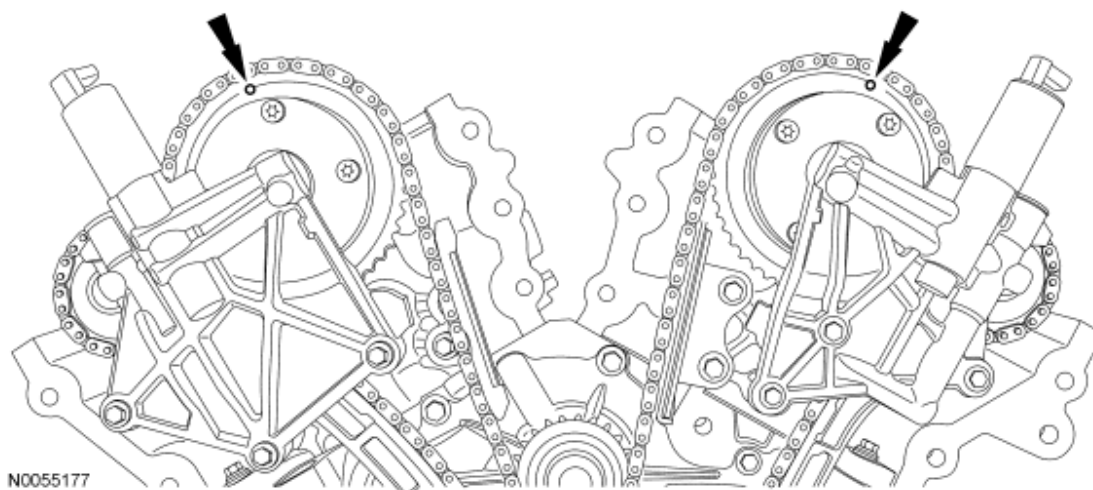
Aligning Timing Marks On Variable Camshaft Timing (VCT) Assemblies
